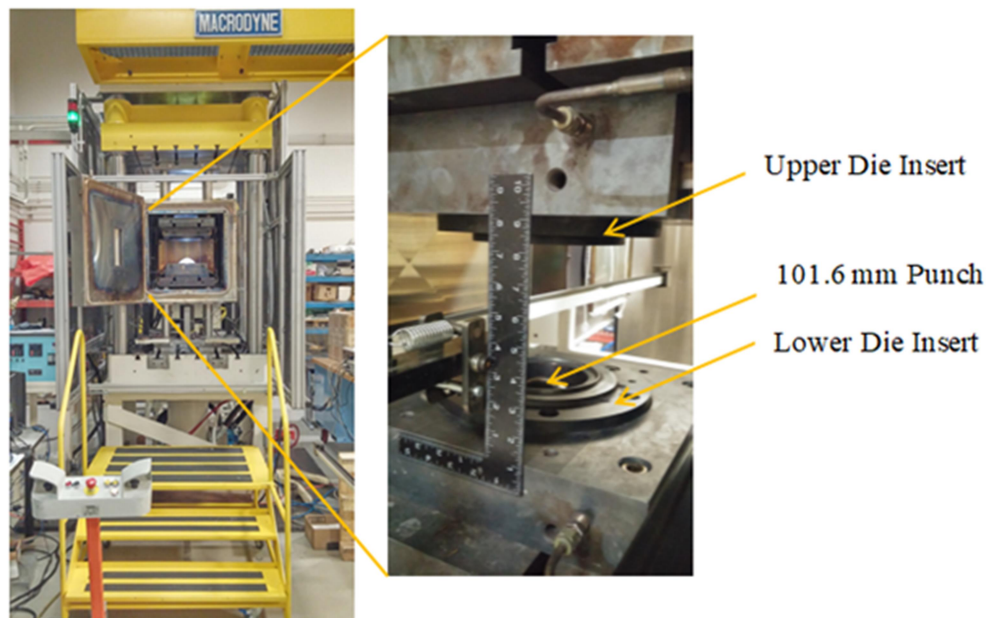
MACRODYNE 150 Ton hydraulic press equipped with 101.6 mm punch diameter dome test tooling.
